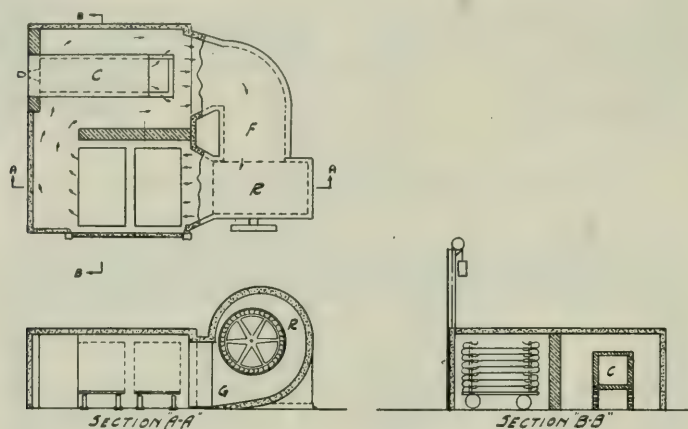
RECIRCULATING DRAWING FURNACE.
